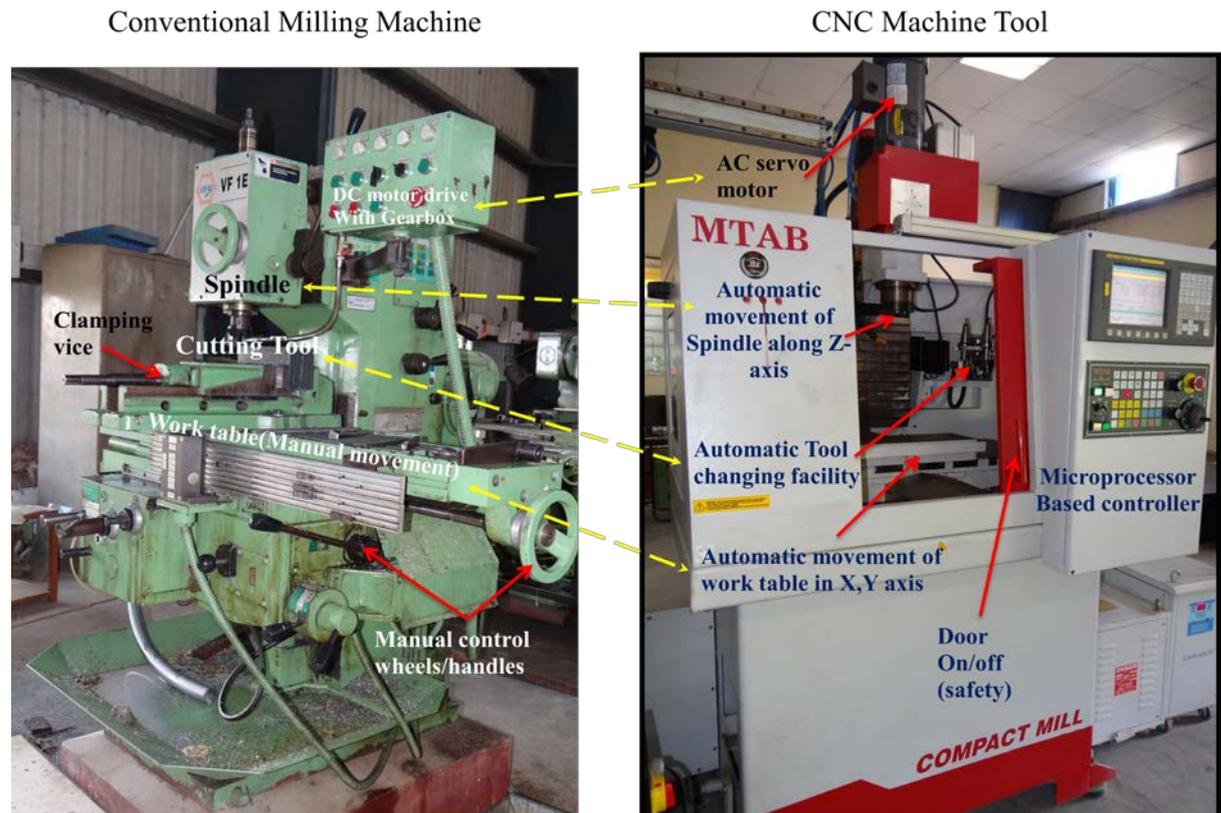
Comparison between a conventional machine tool and a CNC machine tool
